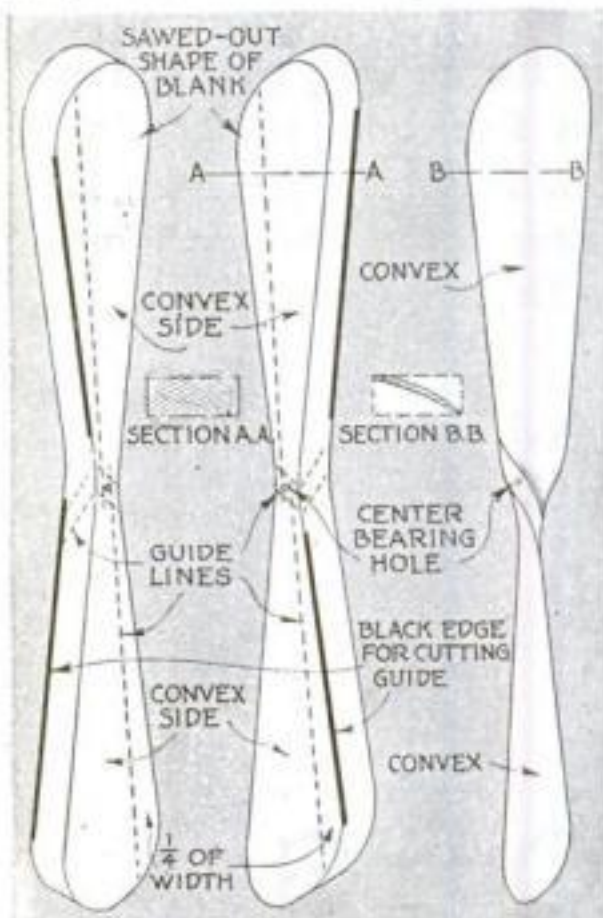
Two views of the front of a blank marked for carving; the finished propeller.
